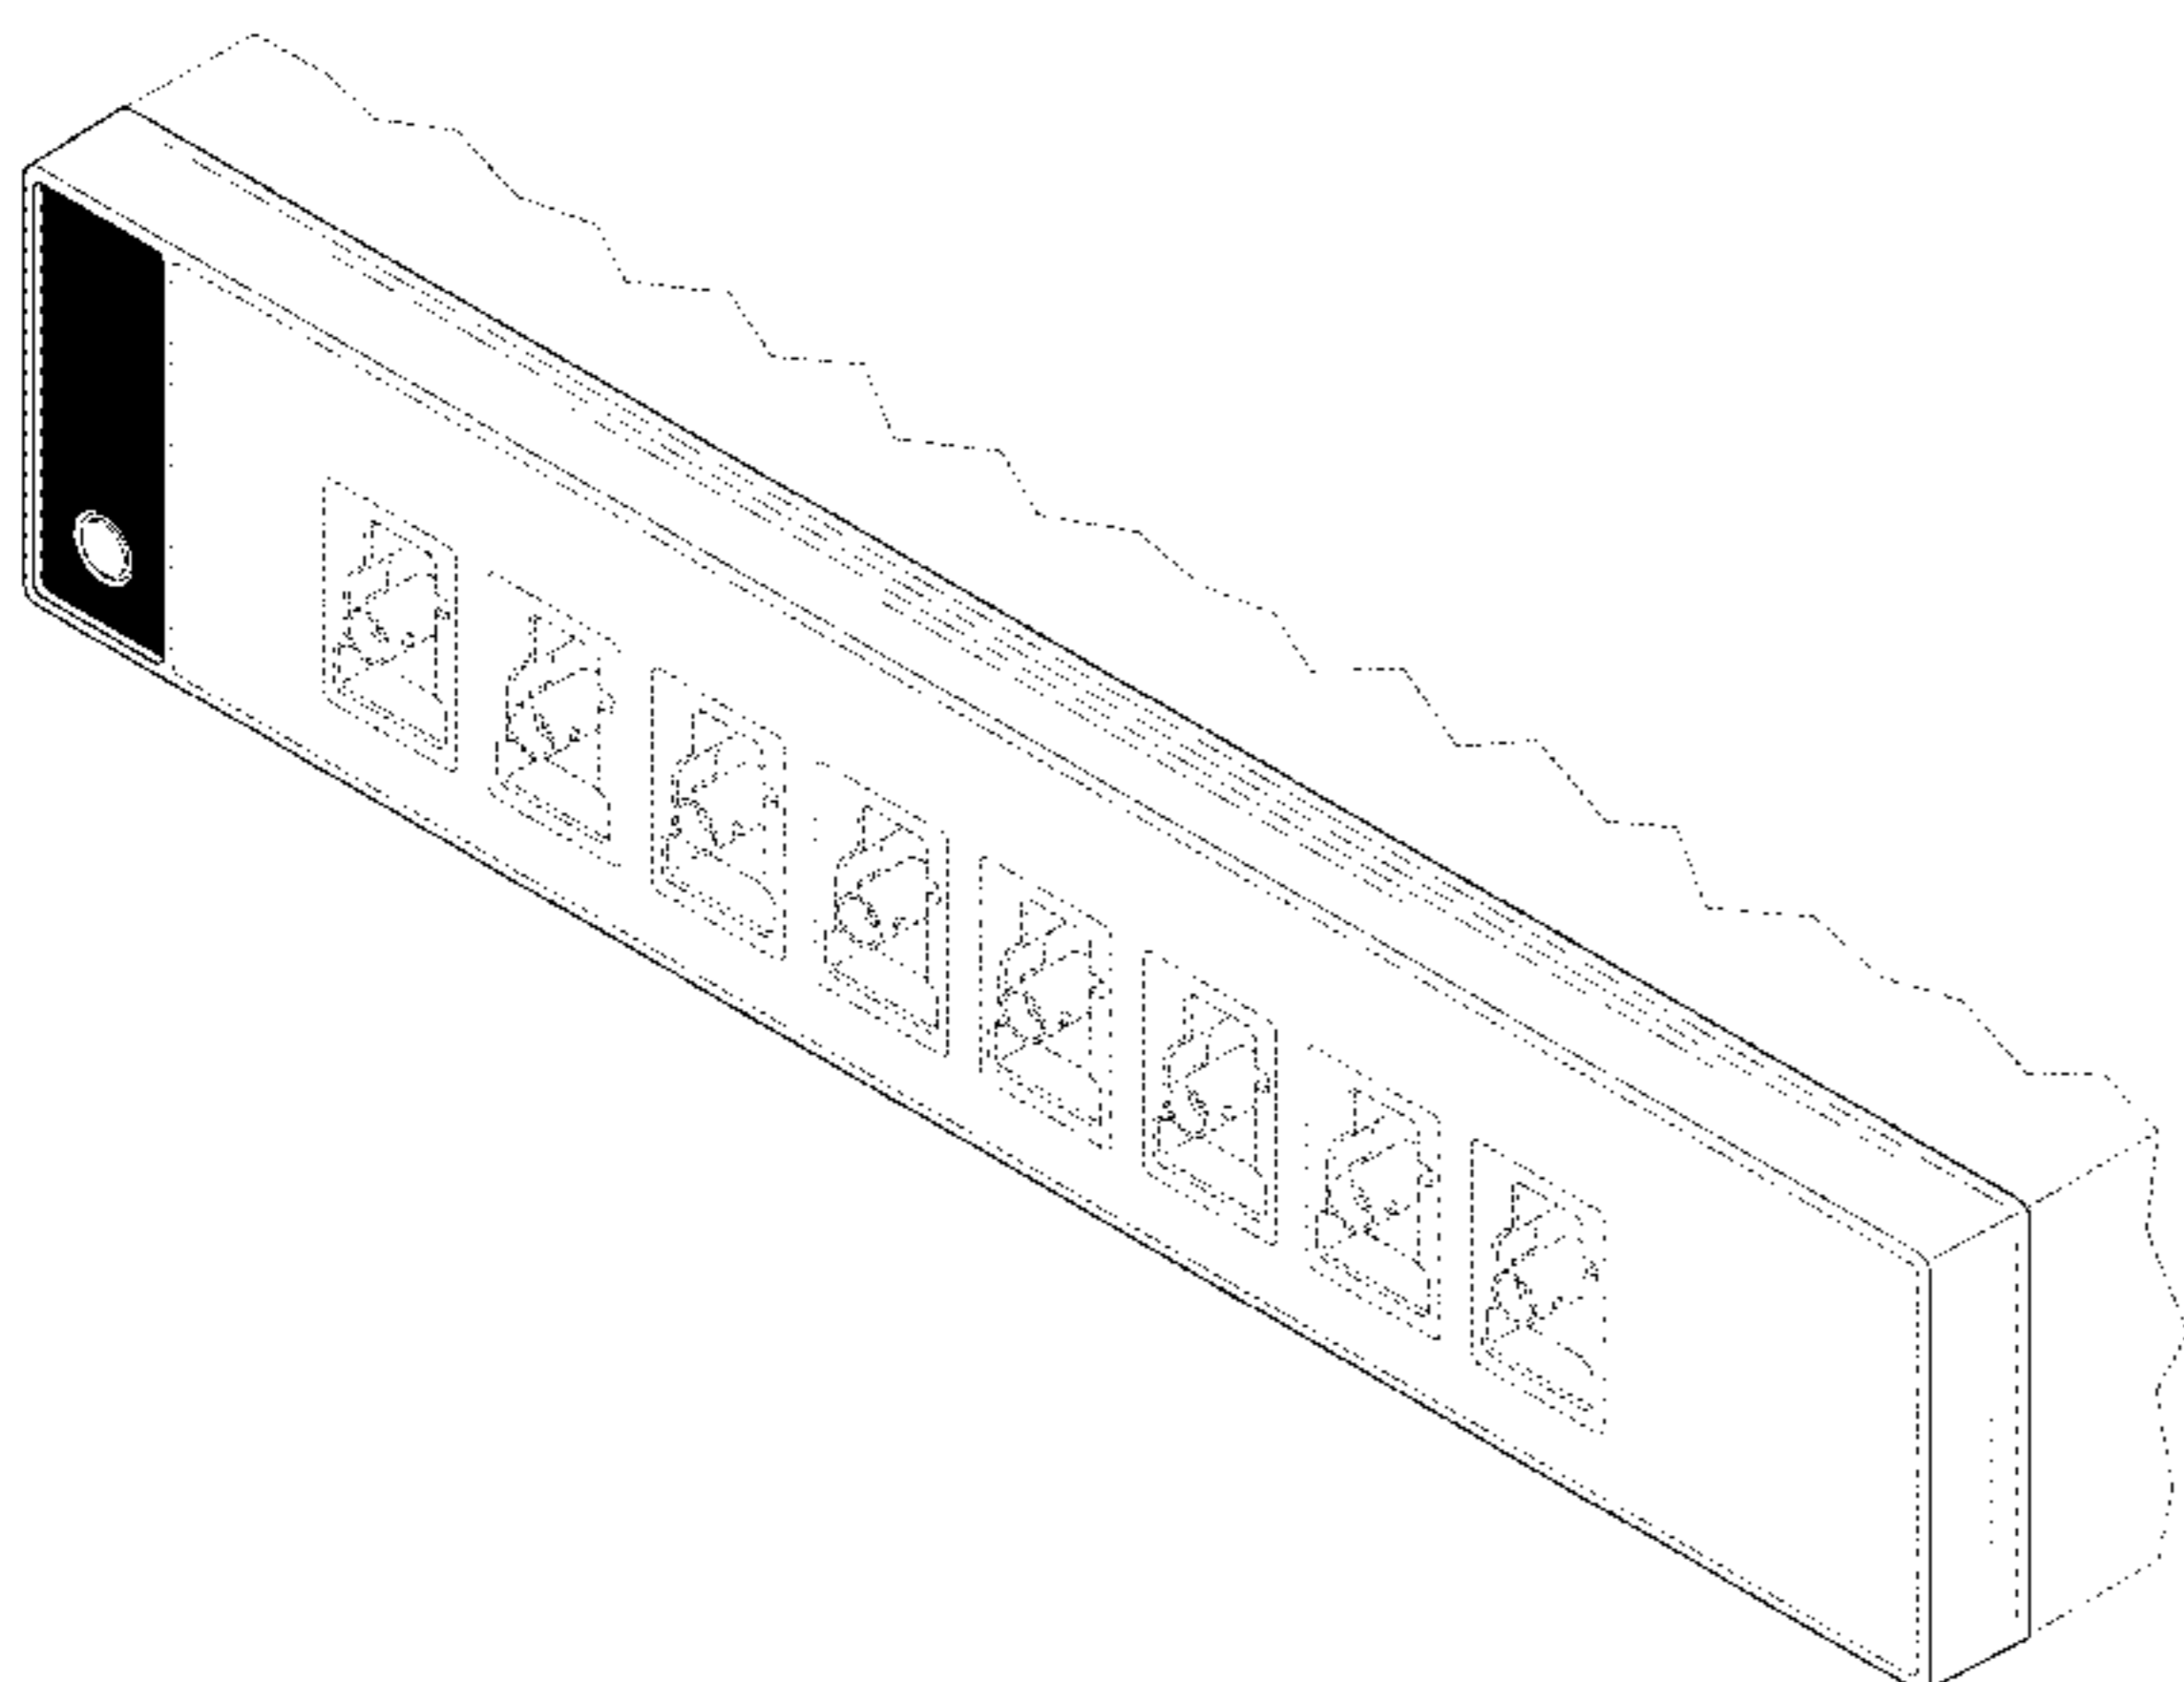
is a partial view of the left end of the front panel for electronic equipment of FIG. 1.
